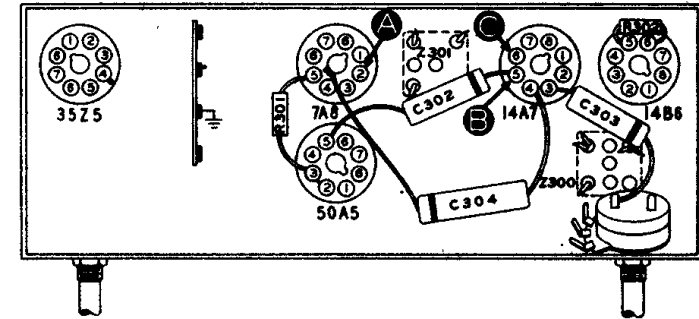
BOTTOM VIEW, SHOWING SECTION 3 TEST POINTS
